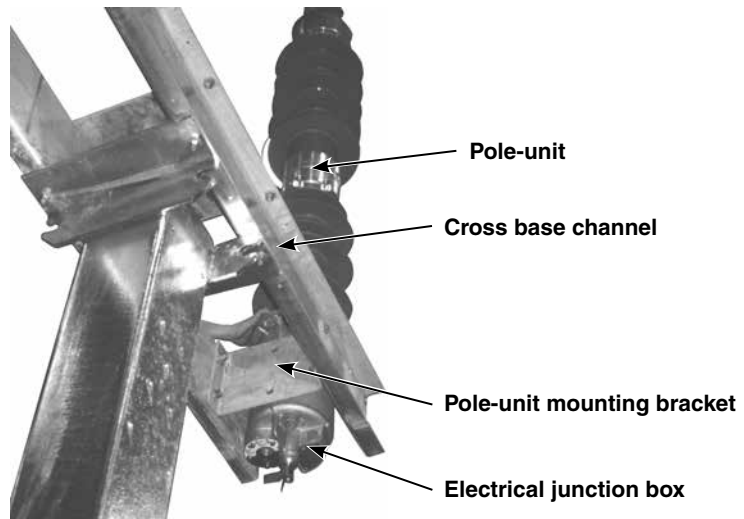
Place the pole-unit in the cross base channel so that the mounting bosses are aligned with the holes on the cross base and pole-unit mounting bracket.
